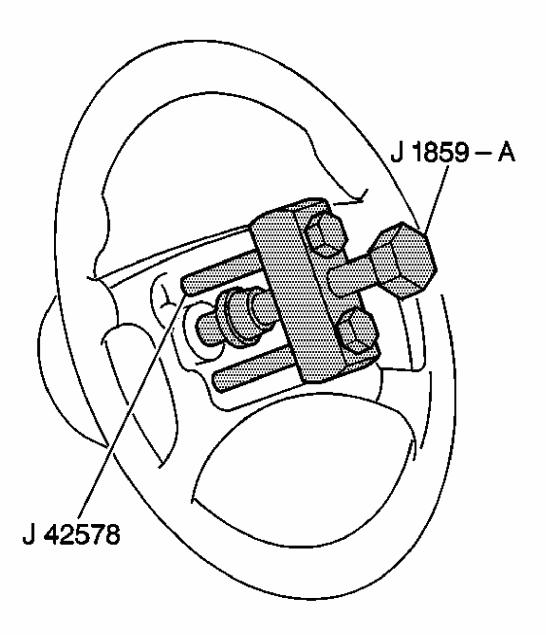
Removing/Installing Steering Wheel Courtesy of GENERAL MOTORS CORP.
